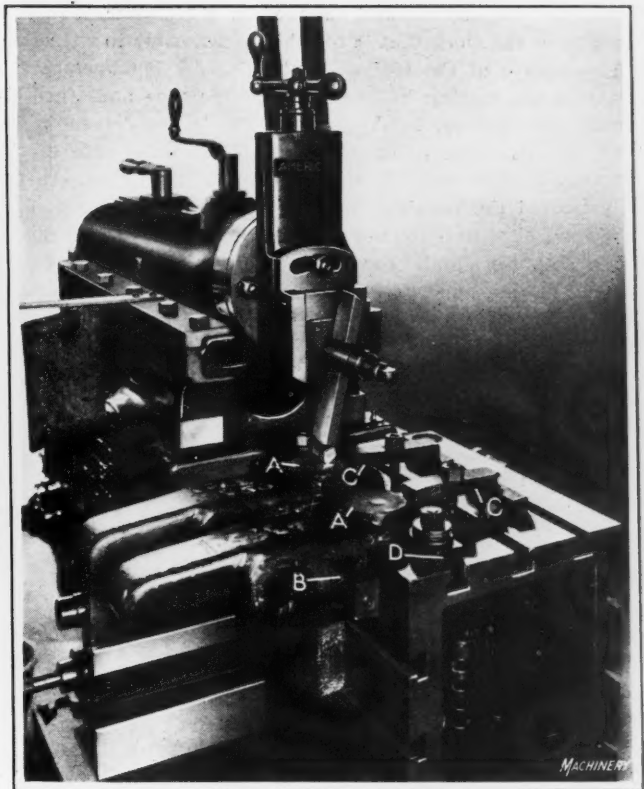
Shaper equipped for planing the Faces of Bosses on Screw Supports for Engine Lathes
